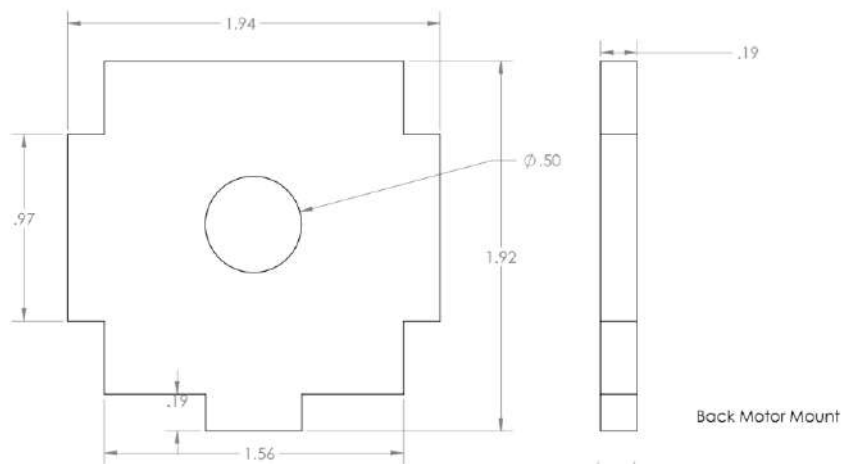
Back Face Motor Mount: There were 2 back face motor mounts for the 2 motors.
